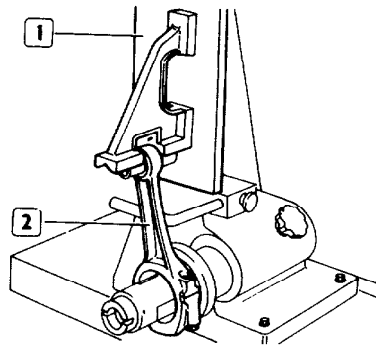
DETAILS OF CONNECTING ROD, BUSH, PISTON PIN, PISTON AND BEARINGS
